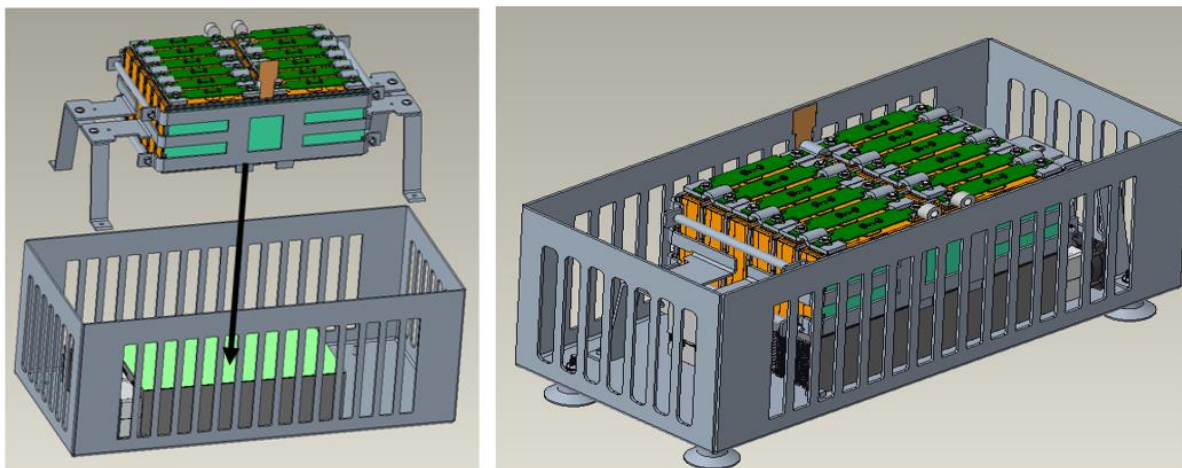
Left) Integration of Cell-Stack into Heat Sink with Adhesive Glue, right) Assembled Cell-Stack with Heat Sink.
